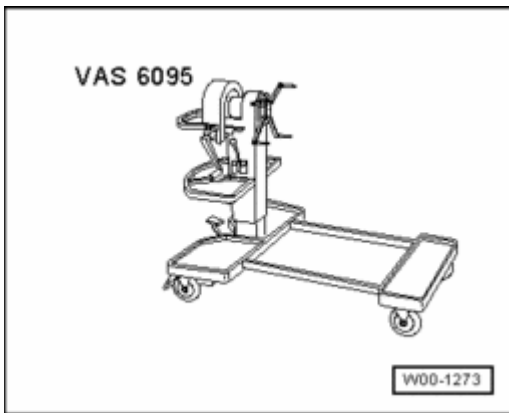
Special Tool - Engine/Transmission Holder VAS 6095
